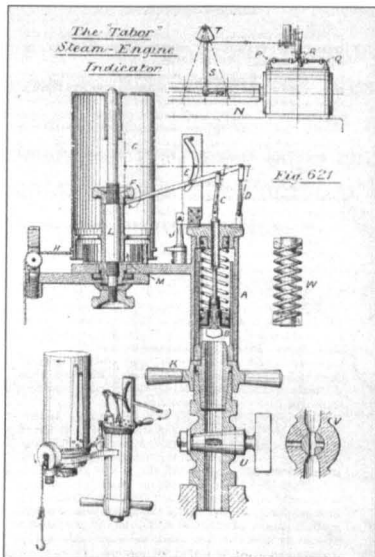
The “Tabor” Steam Engine Indicator of 1906
